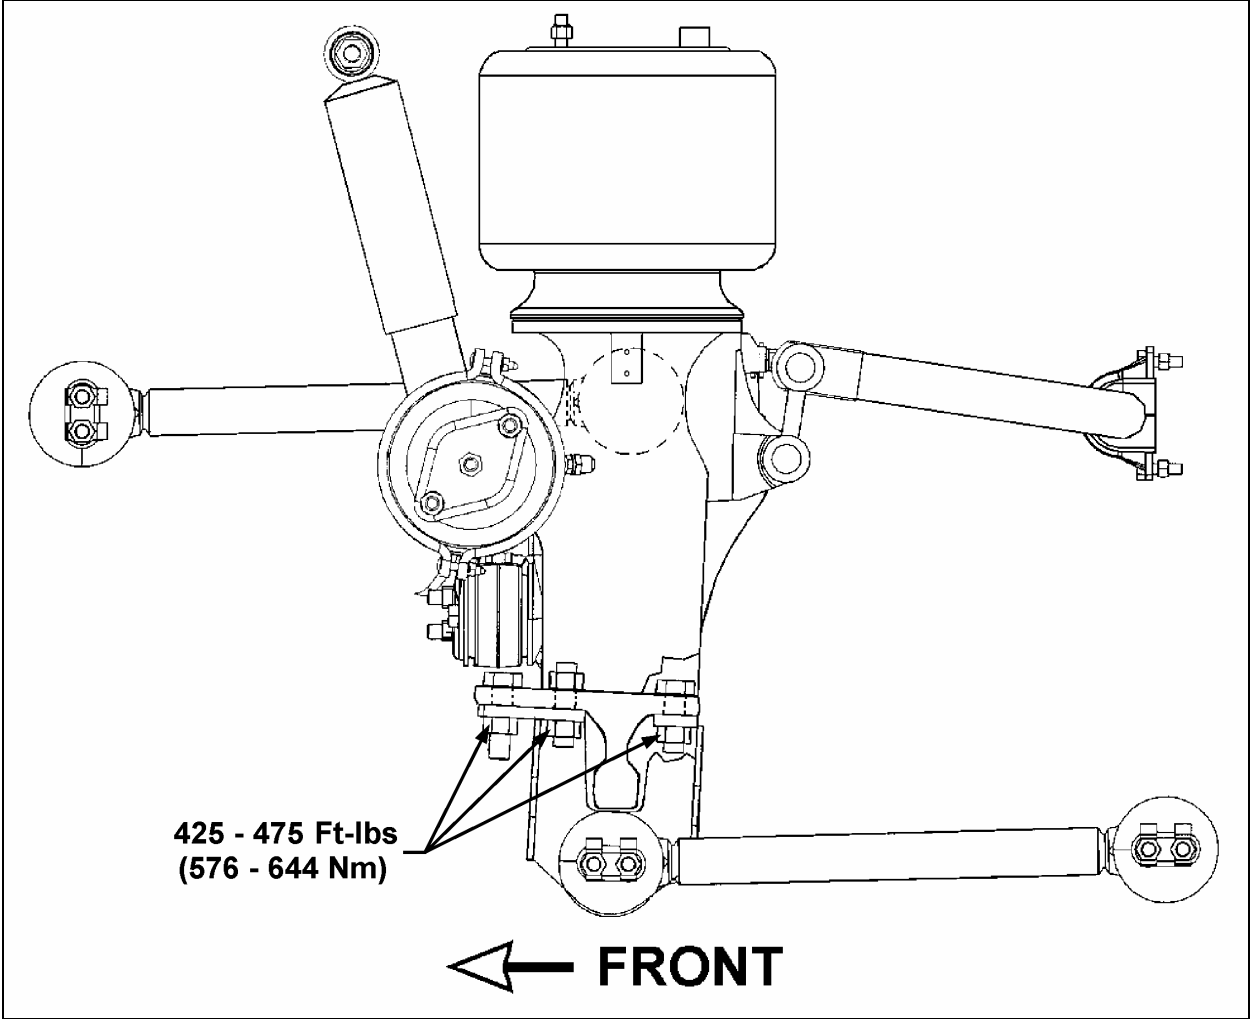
AIR BELLOWS MOUNTING SUPPORT AND AXLE
